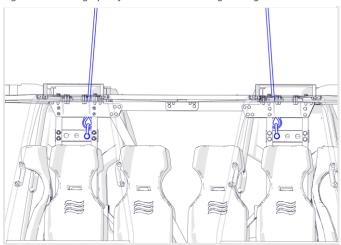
Handling Eye Lift Points Load Testing Arrangement
